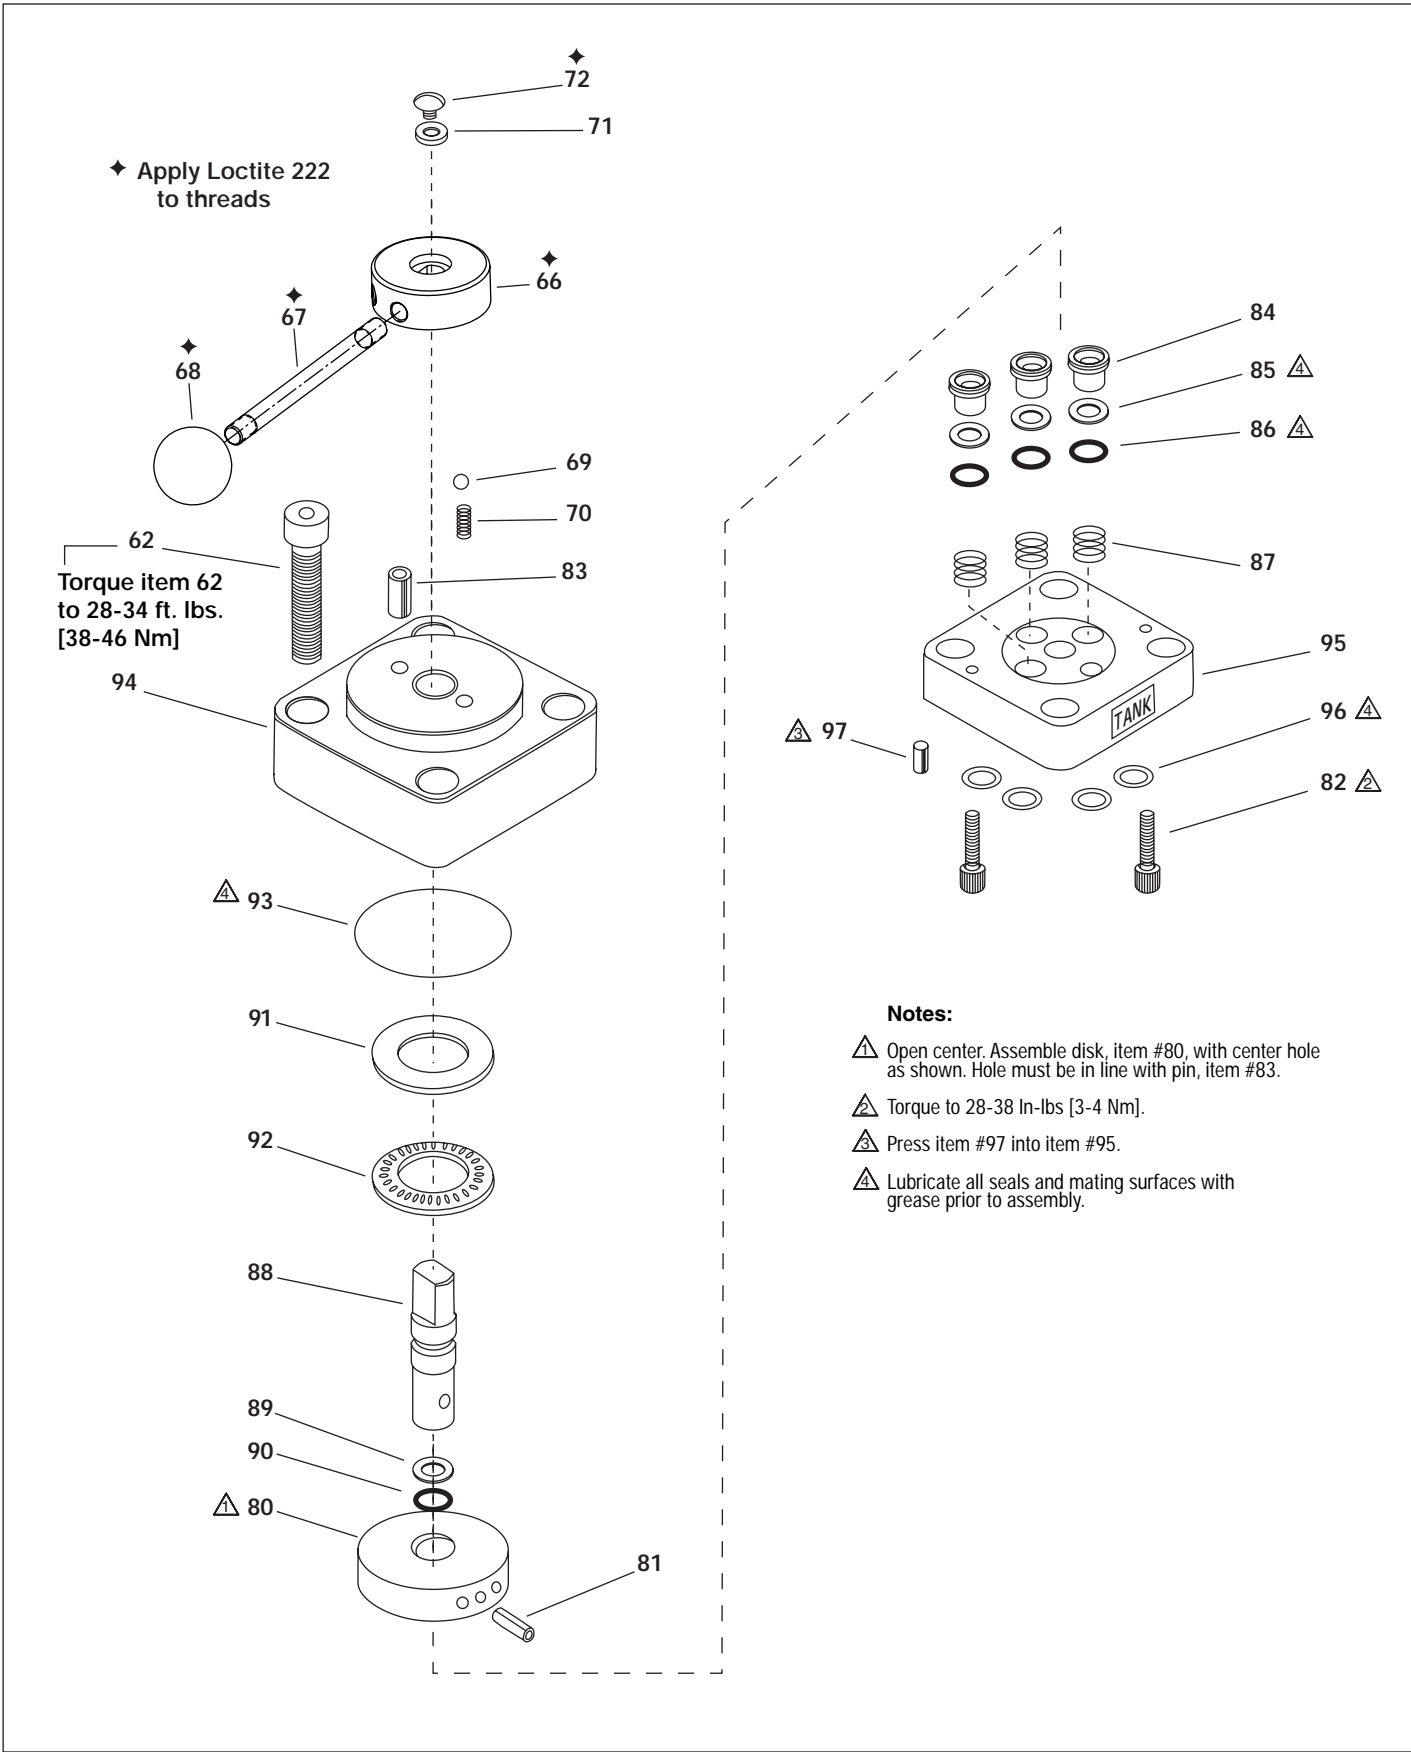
, DC7400950SR, 4-Way Manual Valve Assembly
